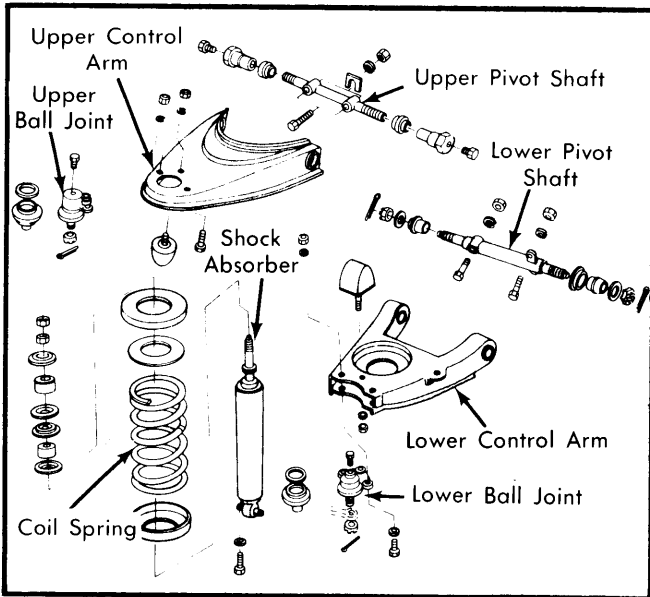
Exploded View of Front Suspension Assembly for Component Identification
